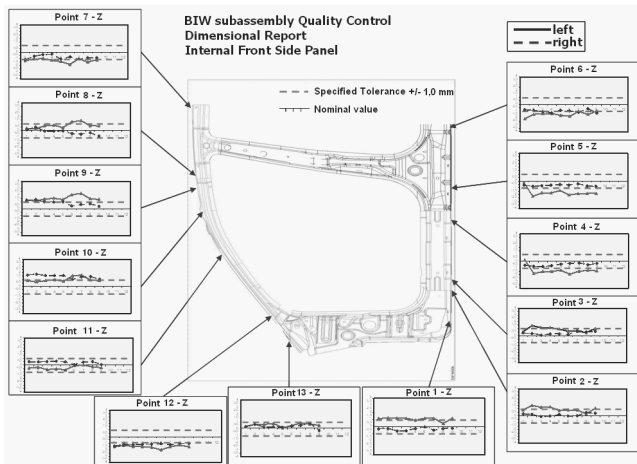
Dimensional report for the BIW subassembly quality control of an internal front side panel
